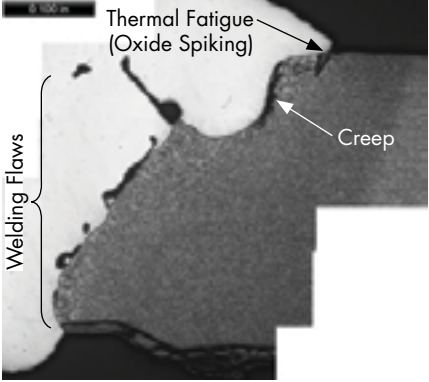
Cross sectional view of the DMW removed from the penthouse. The DMW contained extensive welding flaws. Service related damage was also observed (Etchant: Nital).
